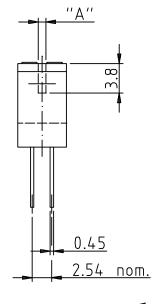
Issue: 2; 10.11.98 96 12094
